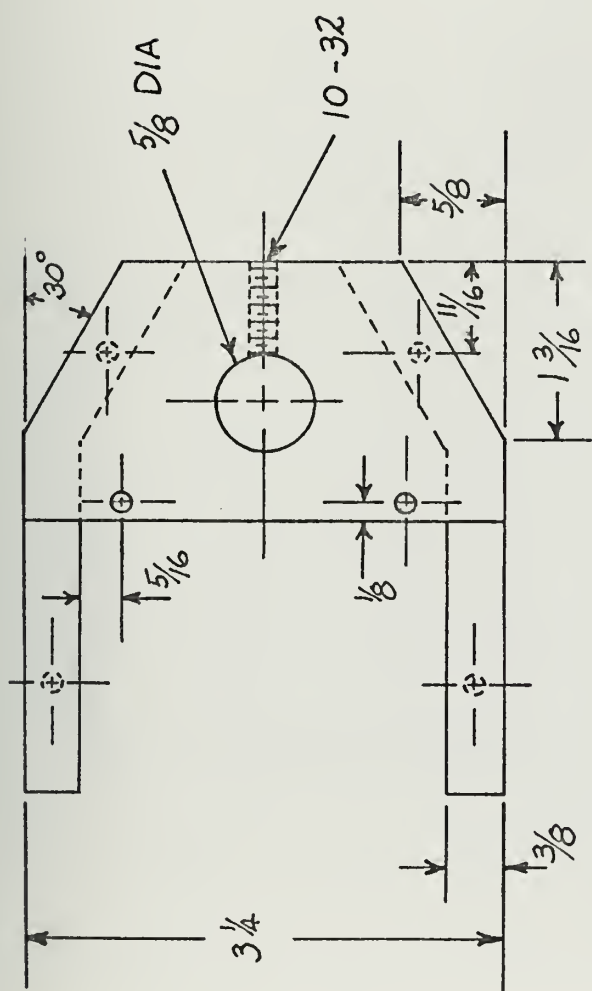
Detail drawing of the aluminum motor mount for the NPS Vane Shear Apparatus
